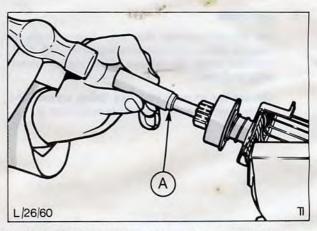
Using a suitably dimensioned tube separate thrust collar from 'C' clip ring
